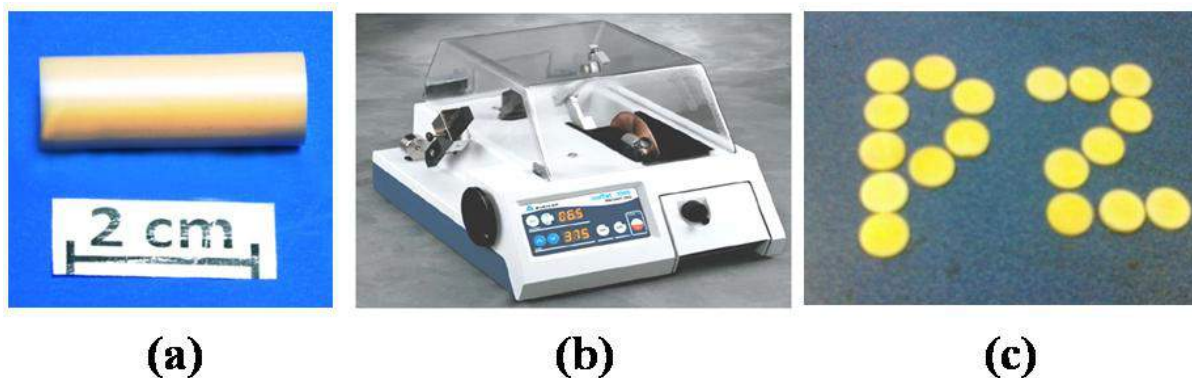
(a) Sintered and ground rod into the shape of a perfect cylinder (b) Isomet cutting machine (c) ceramic pellets cut from PLZT rod.
